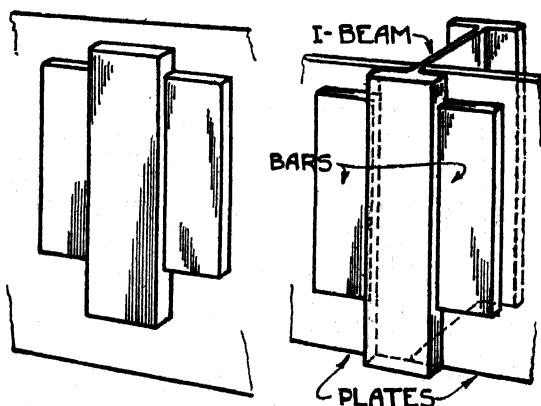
This sketch shows how a functional design can be modified slightly for improved appearance. Functional design embodies an I beam structural member and plate siding. Streamlining effect is obtained by welding two bars to the plate alongside the flange of the I beam as shown.
